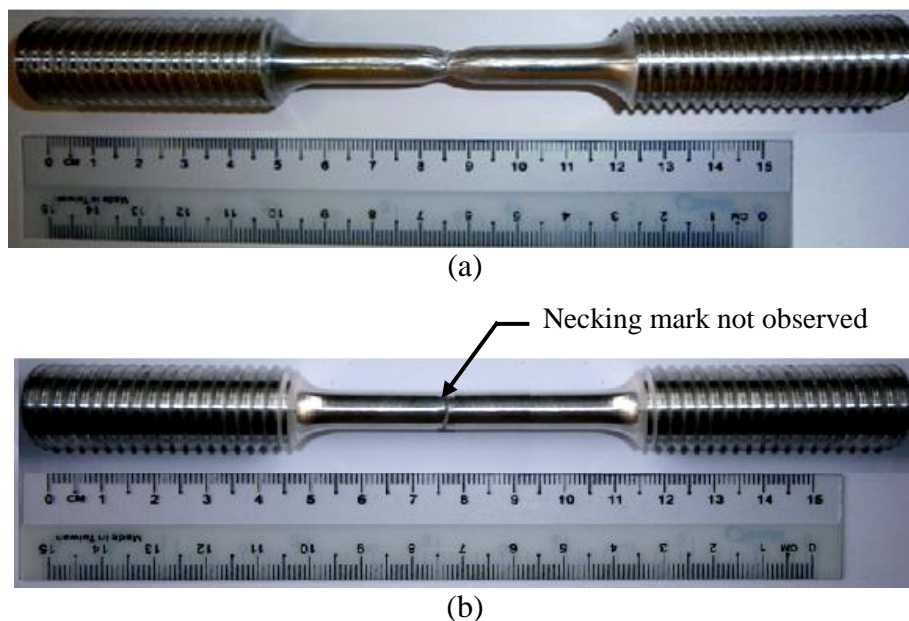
Fracture of specimen after tensile test for aluminium alloy (a) AA6061; (b) AA7075.
